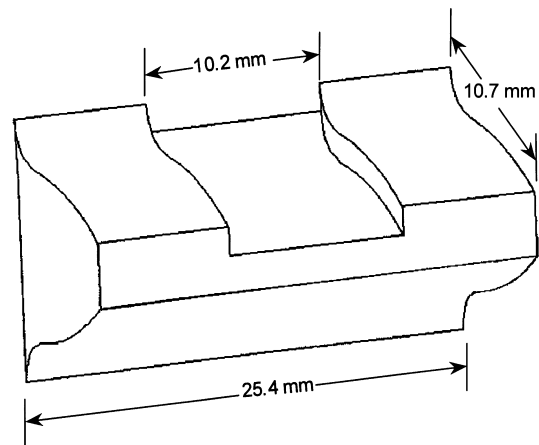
Nominal dimensions of layer removal zone used in finite element modeling.
